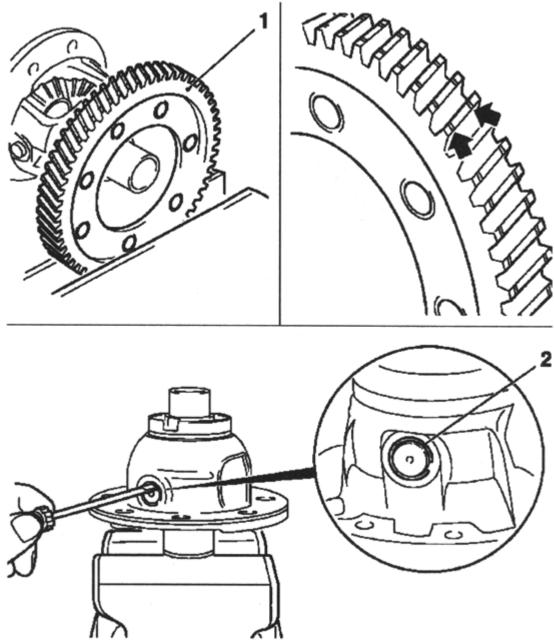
Removing the locking rings: 1 - toothing differential 2 - retaining rings
